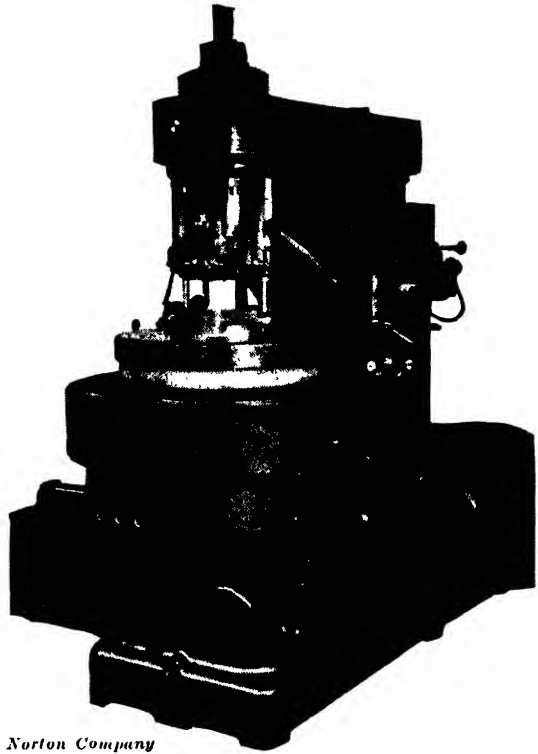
Hydraulically-actuated Honing Machine for Bores $\frac{1}{4}$ " to 2" Diameter Up to 6" Long.
